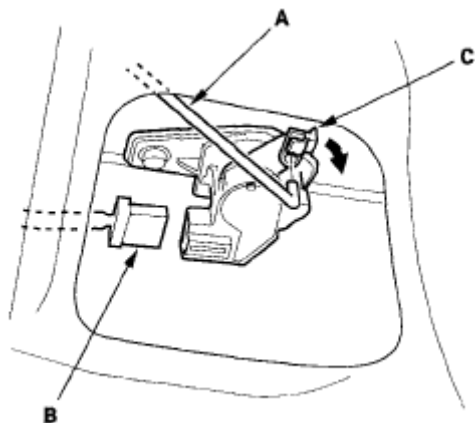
Identifying Cylinder Rod And Cylinder Switch Connector
